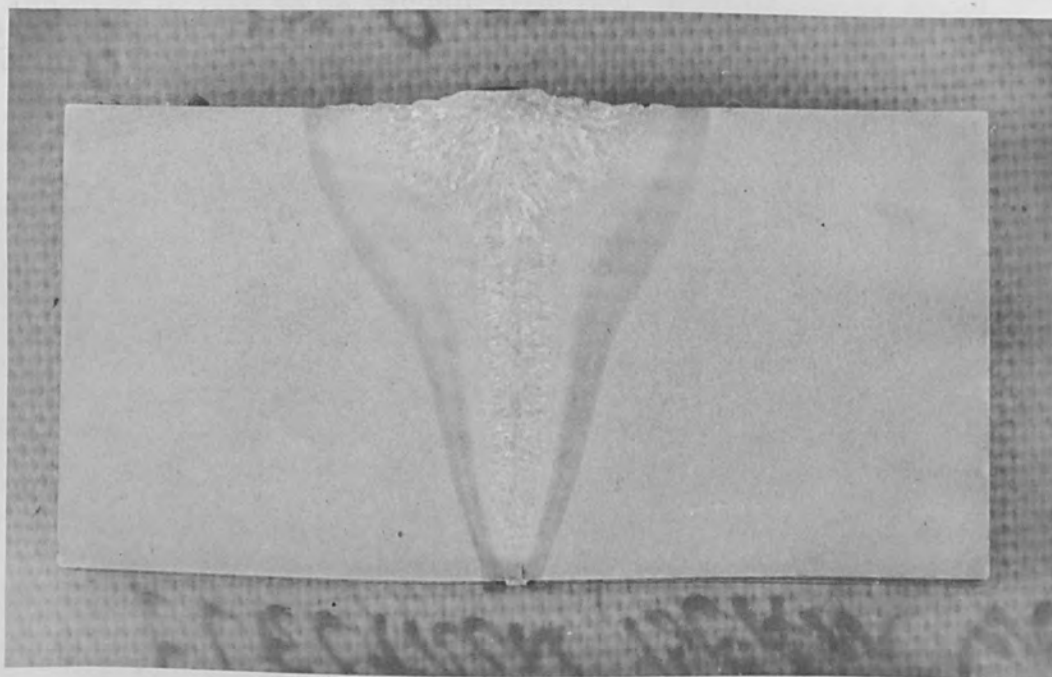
Butt weld in 1" thick 12-chrome alloy steel.
